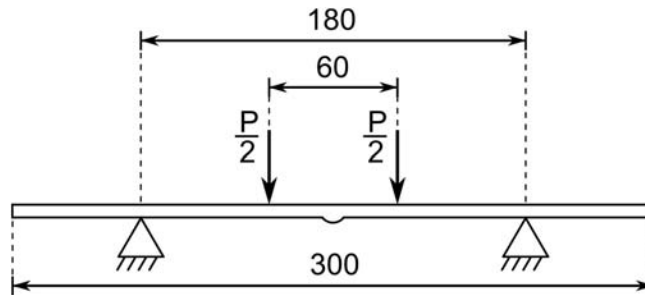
Four-point bend fatigue testing of welded specimens. Note that the specimen is oriented so as to produce tensile stresses transverse to the raised weld seam during the test.
